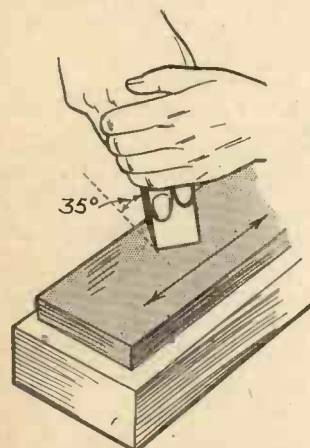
The method of holding a plane iron or chisel for sharpening.
